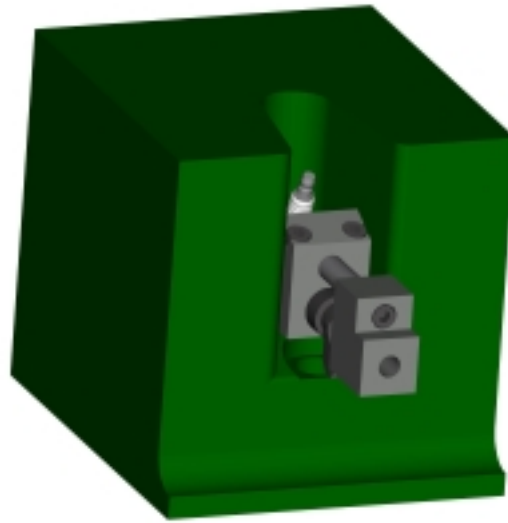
Side View of Cylinder Head and Fuel Injector Mounting Block
